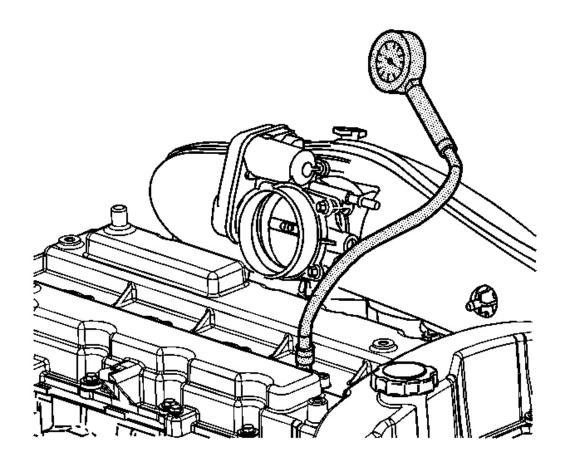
Measuring Compression Pressure Courtesy of GENERAL MOTORS CORP.
